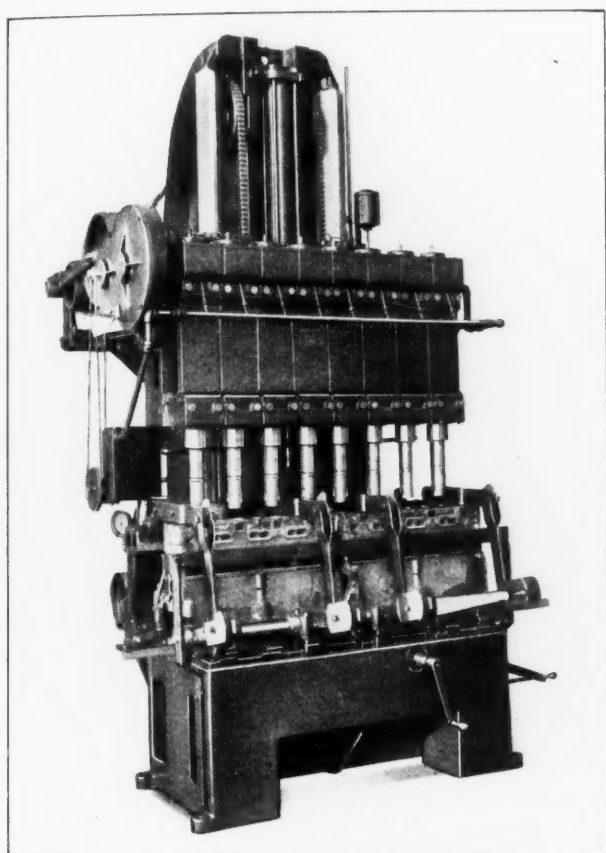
Moline Hydraulic-feed Cylinder Borer of Improved Construction
